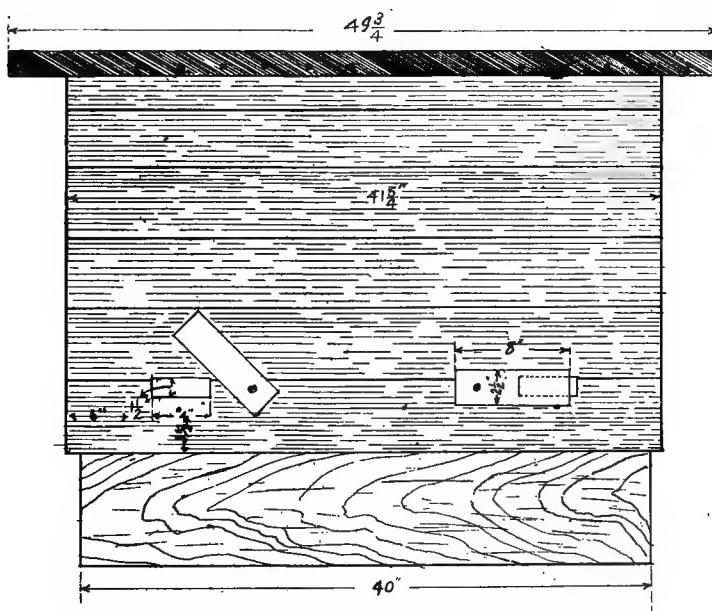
End Elevation of 4-Hive Wintering Box,
